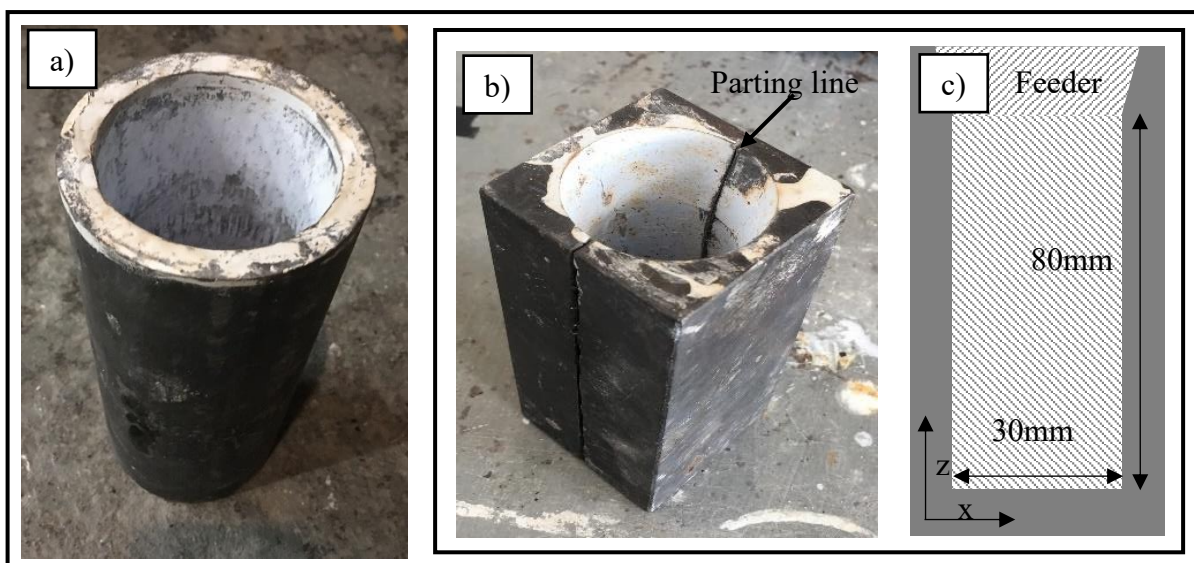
Moulds 1 & 2: (a) photograph of mould 1; (b) photograph of mould 2; and (c) view of the schematic along the parting line of mould 2. Due to the design of the moulds, turbulences and resulting oxide films and inclusions could not be avoided, but were deemed not to have a negative impact on the subsequent experimentation.
